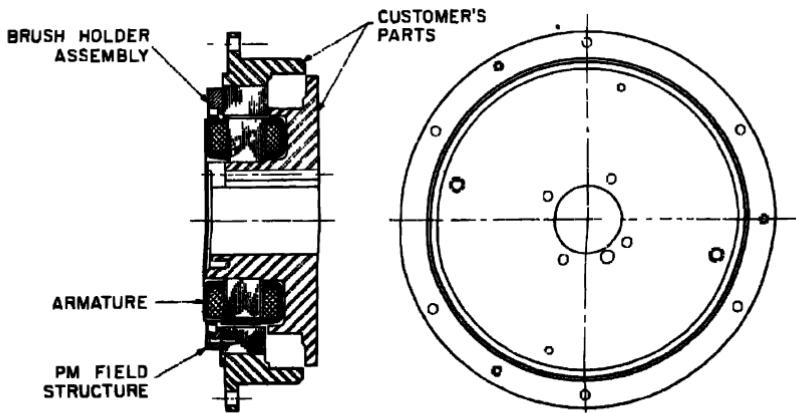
Frameless tach generator with adaptors machined to existing mounting dimensions. (Courtesy of Inland Motors Division, Kollmorgen Corporation. From Reference 19.)
